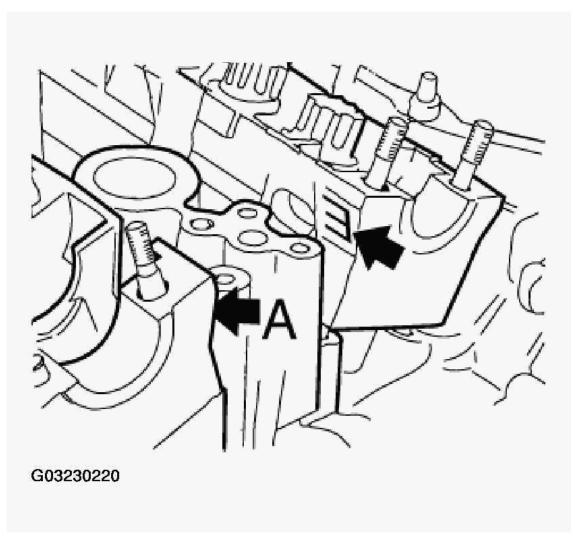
Checking Bearing Points For Scoring Courtesy of BMW OF NORTH AMERICA, INC.
